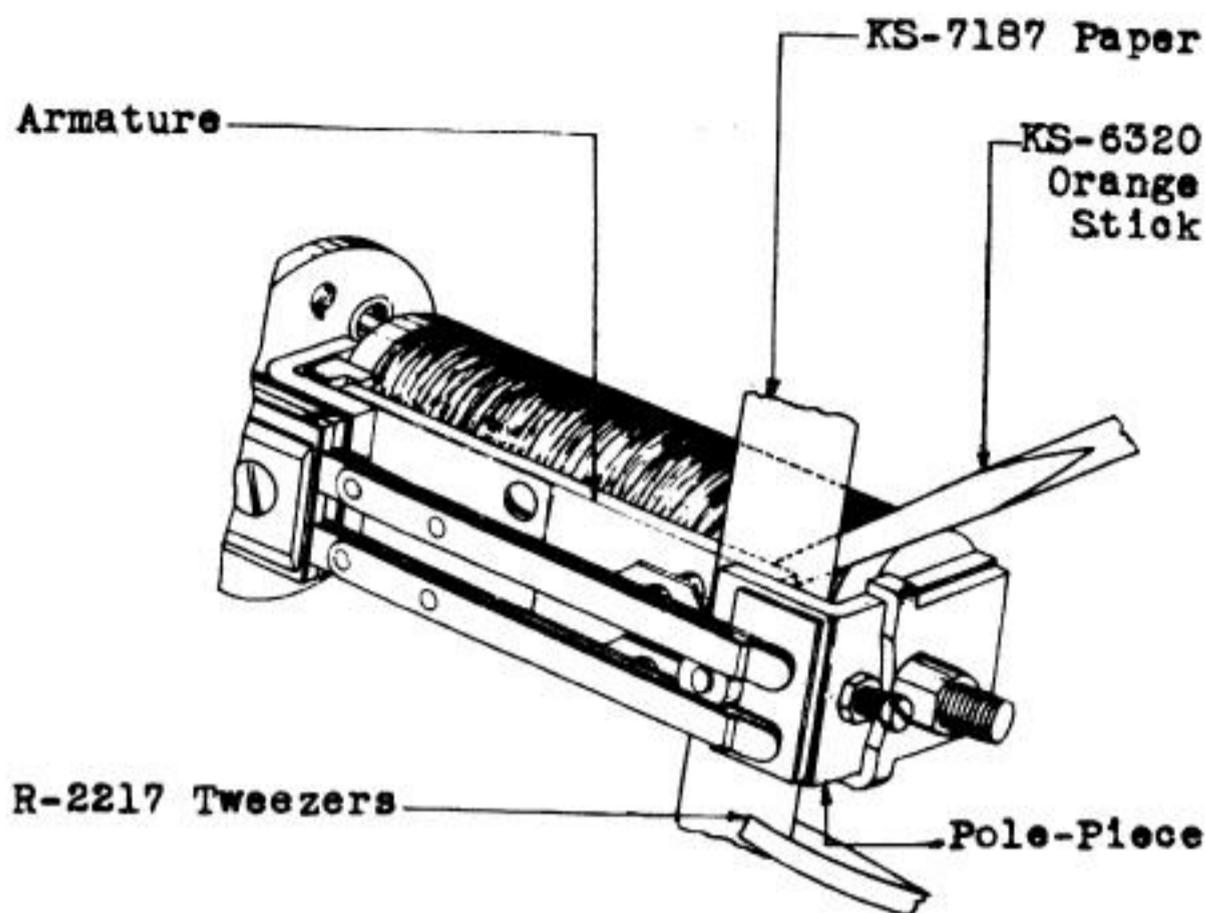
Method of Cleaning Armature and Pole-piece on 111 and Similar Type Relays
